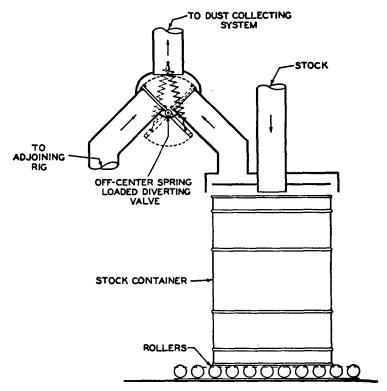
Arrangement of molding powder packaging rig, showing an efficient dust collecting hood and a special diverting or two-way valve in the dust collecting duct system.
